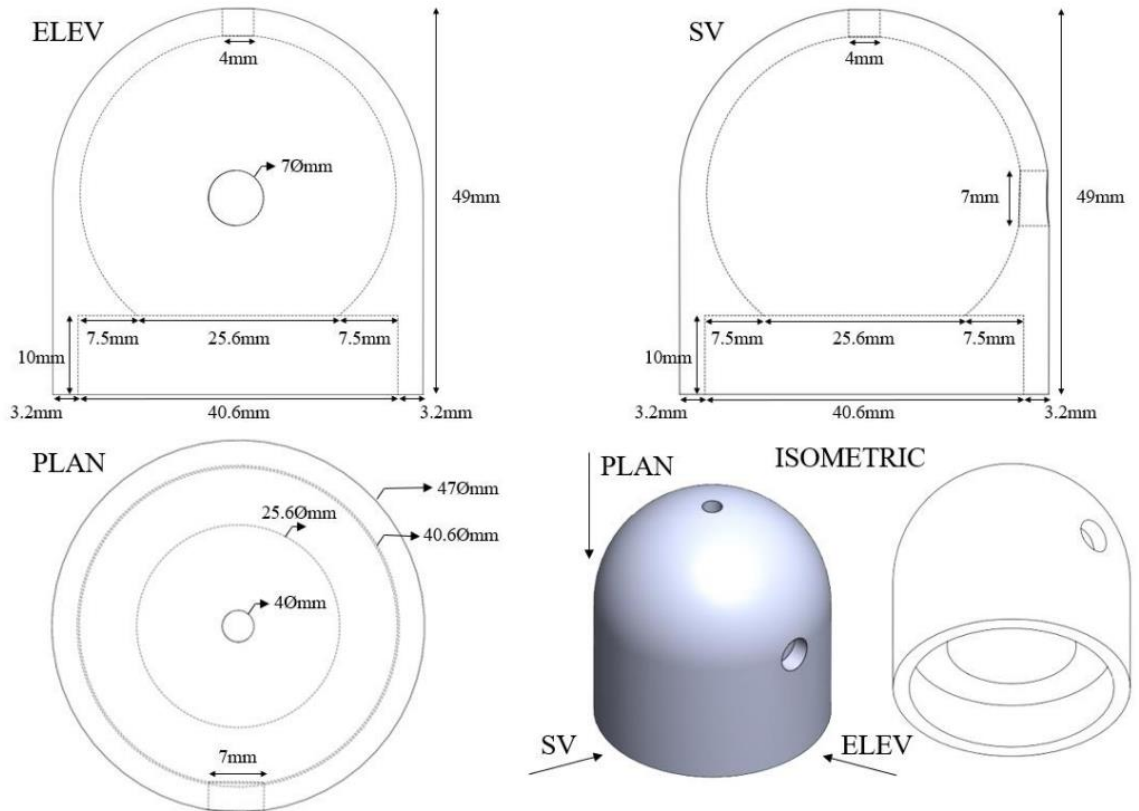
Schematic depiction of the designed test chamber , detailing elevation, side, and plan views.
